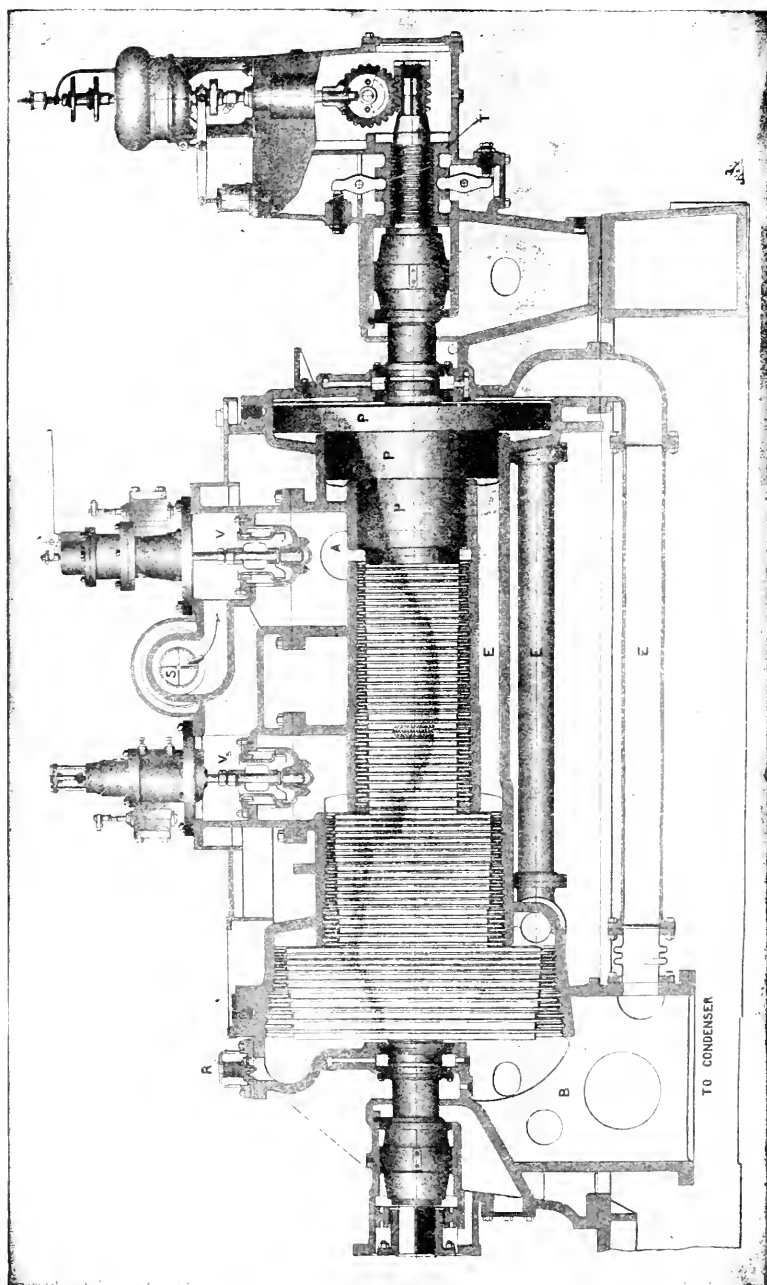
Cross-sectional view of a Westinghouse-Parsons steam-turbine.
